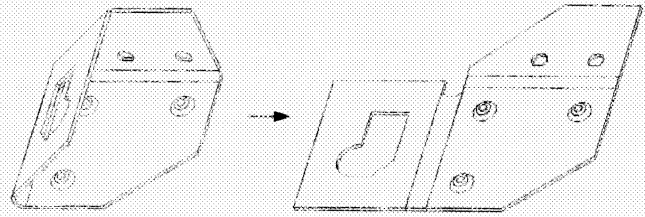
FIGURE A Sheet Metal Part in Its Designed Condition and As an Unfolded Flat Pattern
